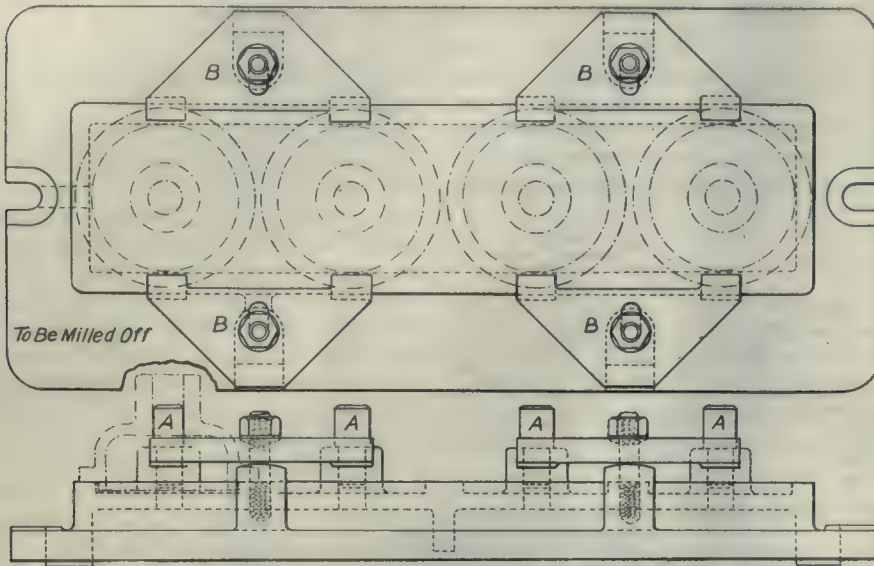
MILLING FIXTURE FOR FACING HUBS OF GEAR CASE.
